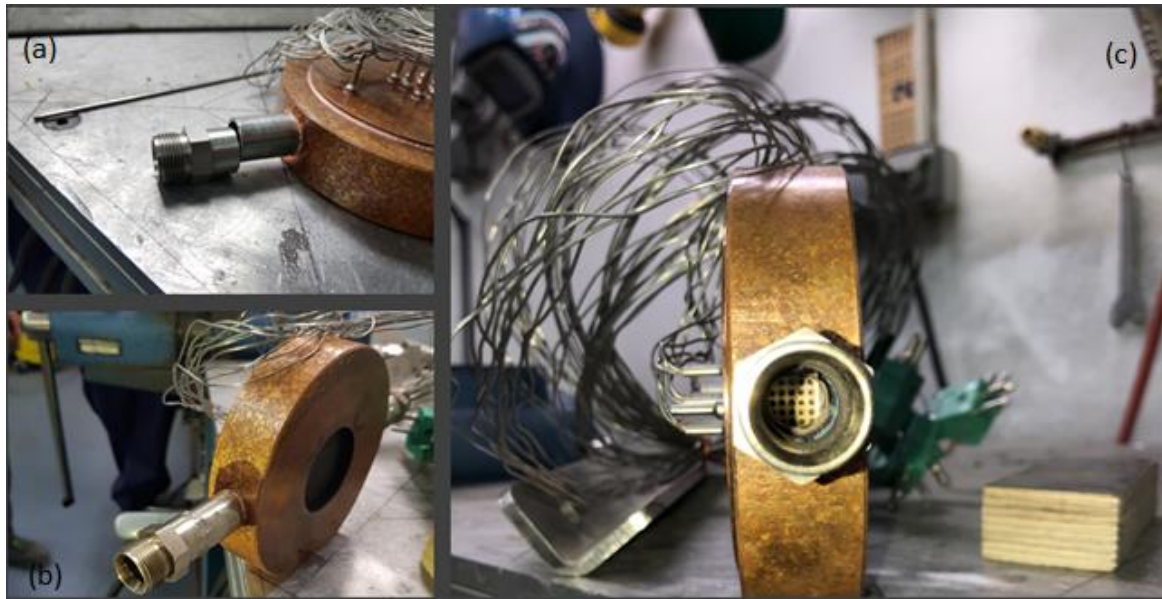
Details of the RRs Mock-up welding to the connection pipes of the solar furnace: (a) before welding, (b) after welding, (c) view of the inside of the two connected pipes.
